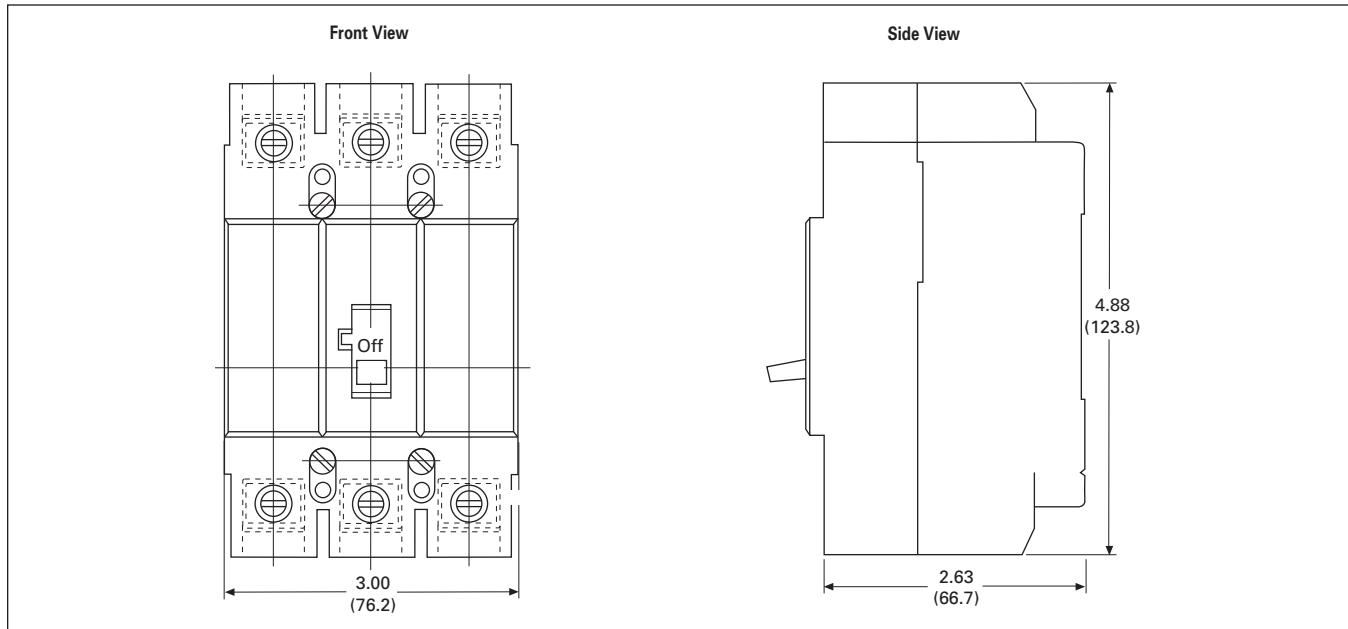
GD-Frame, 3-Pole — Dimensions in Inches (mm)
